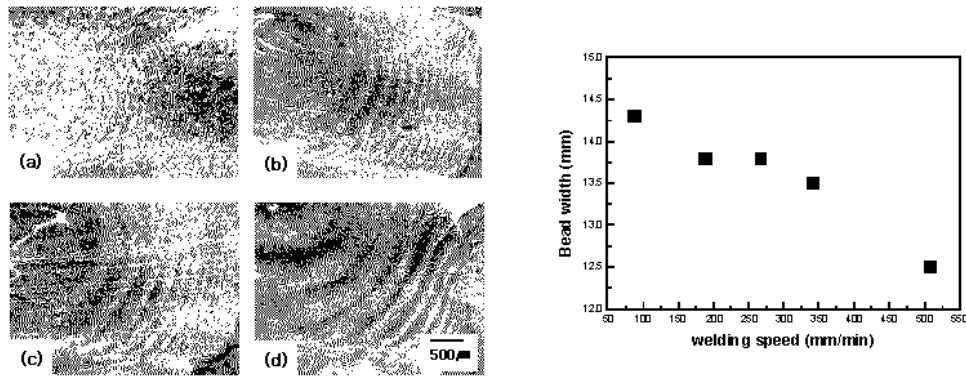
The variations of onion ring pattern(left side) in the weld zone, (a) 87mm/min, (b) 267mm/min, (c)342mm/min, (d) 507mm/min and the relation between welding speed and welding bead width(right side)
